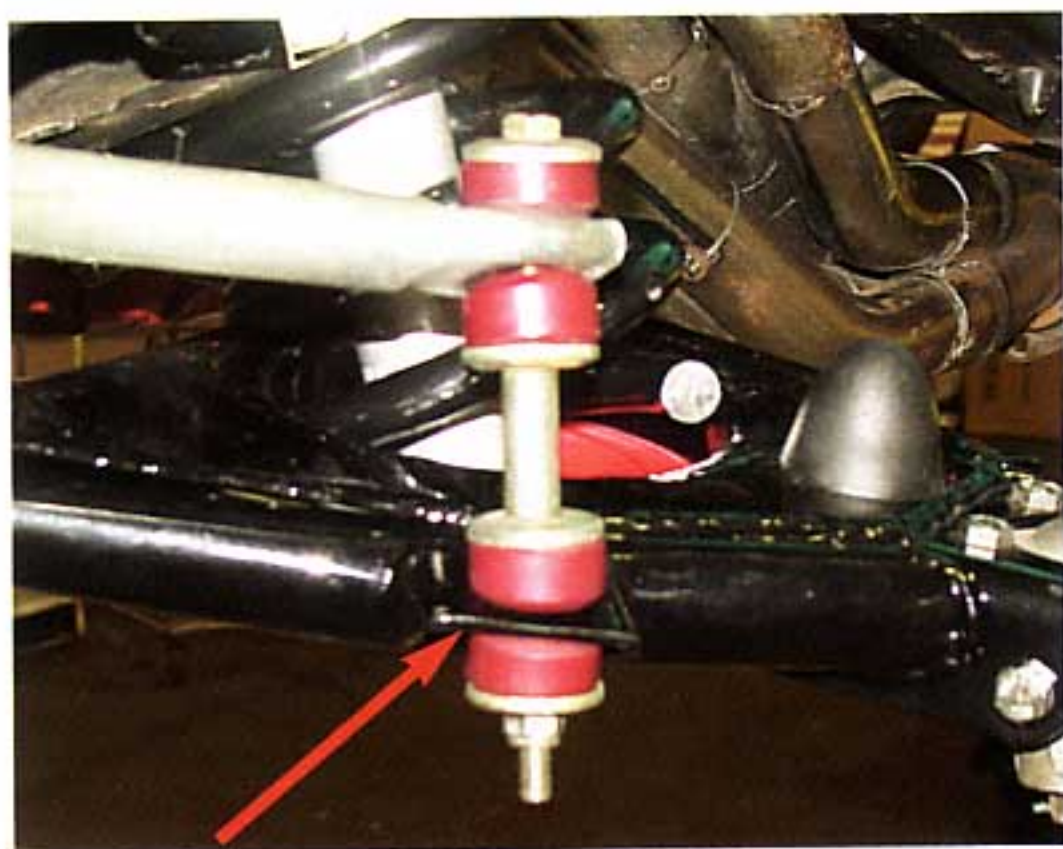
Note the new lower control arm already has a tab welded to the forward side in the correct location for the sway bar link. Drive your car to the local alignment shop and follow the proper specs for your steering and brake types. Good luck!
